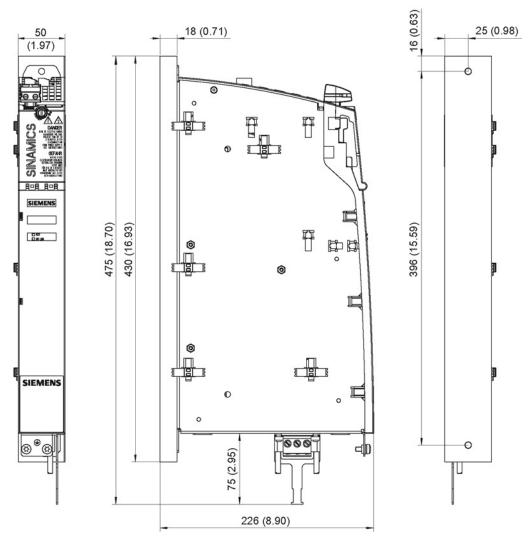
Dimension drawing of Smart Line Module with cold plate (5 kW and 10 kW), all dimensions in mm and (inches)
